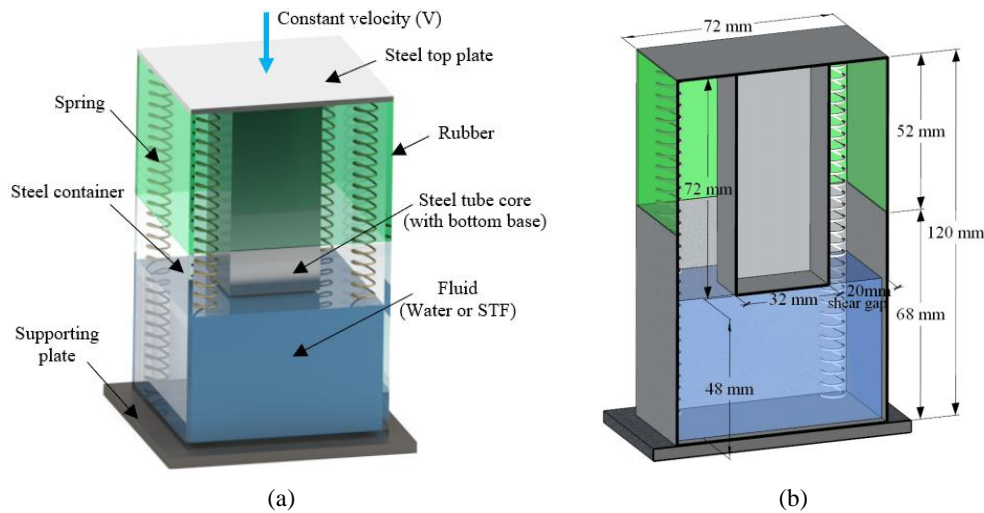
(a) Specimen details and (b) cross section of the specimen.
